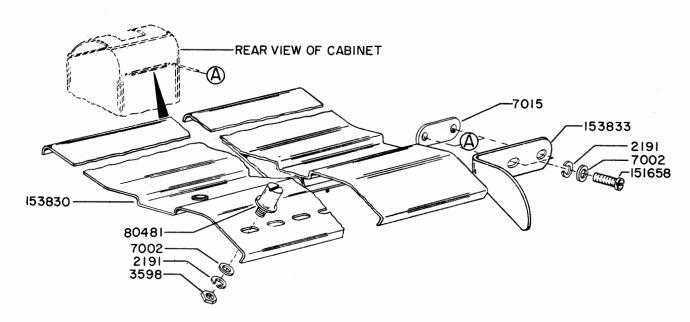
153926 SPROCKET FEED REAR PAPER GUIDE MODIFICATION KIT
